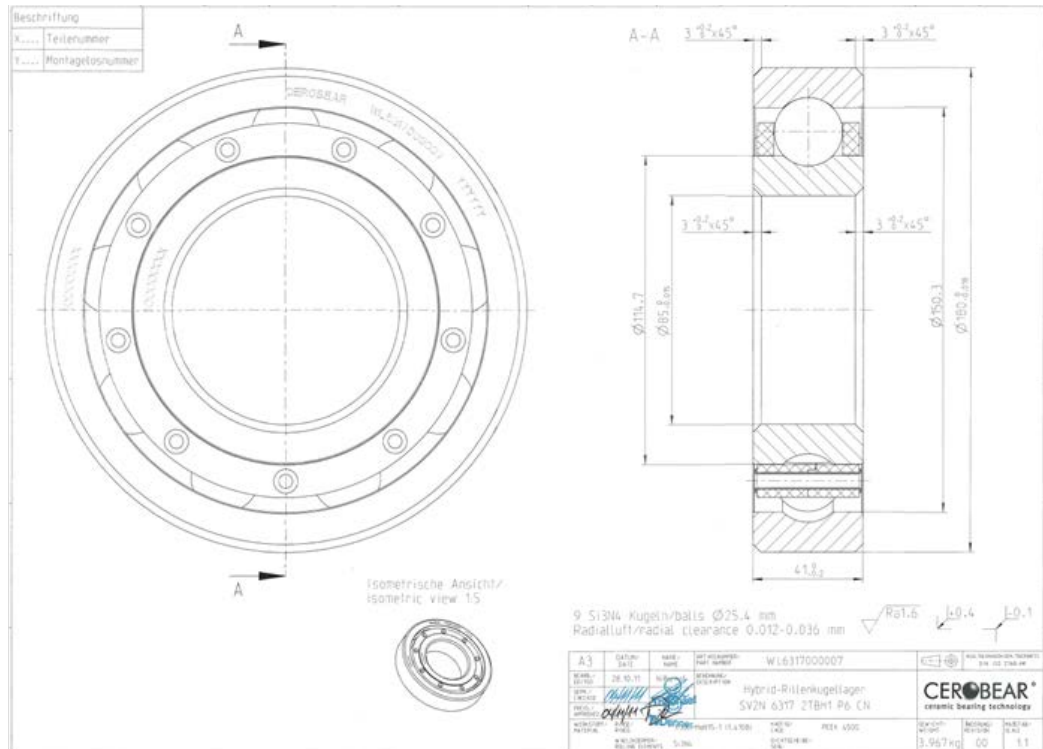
The ceramic ball bearings applied in the design of the R134a turbine.
